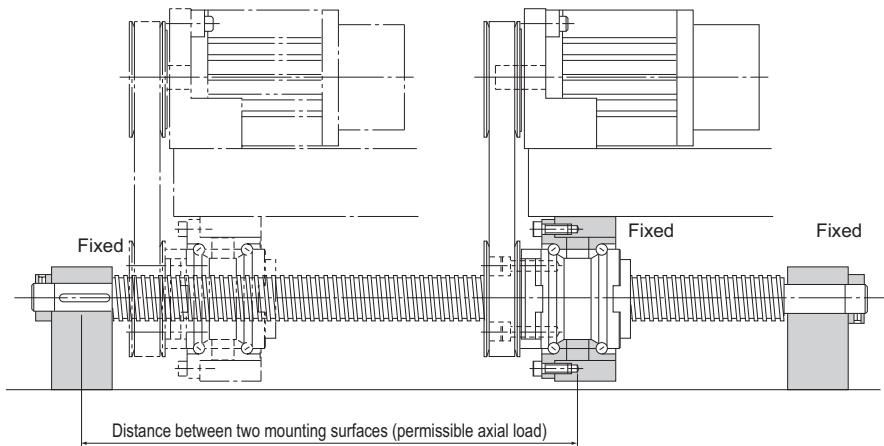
Screw Shaft Mounting Method for Rotary Nut Ball Screw: Fixed - Fixed
